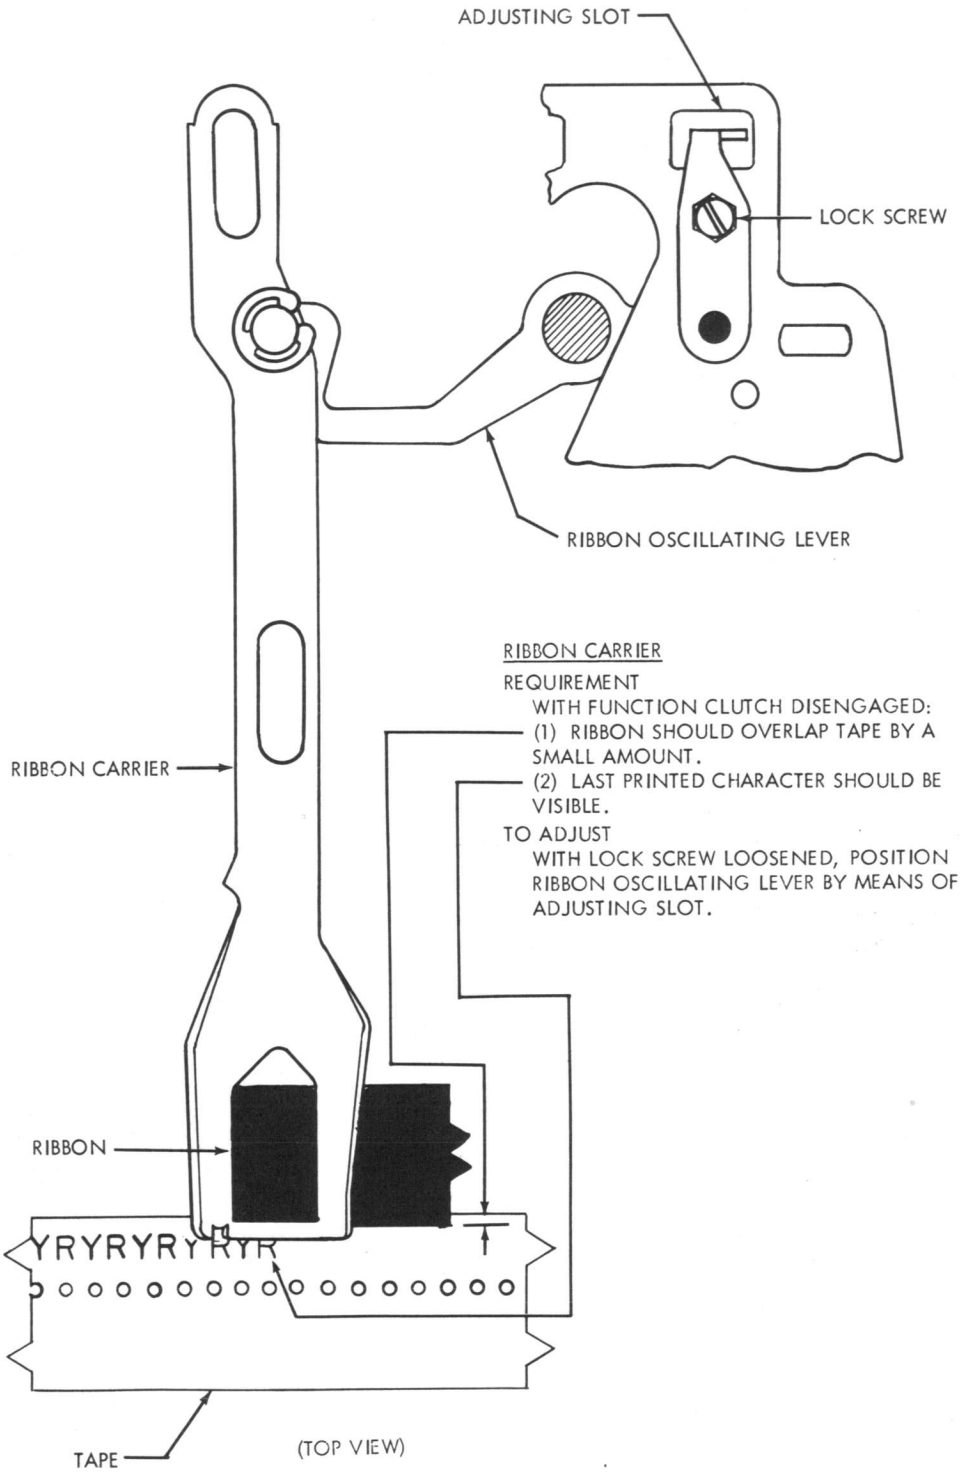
RIBBON OSCILLATING MECHANISM
